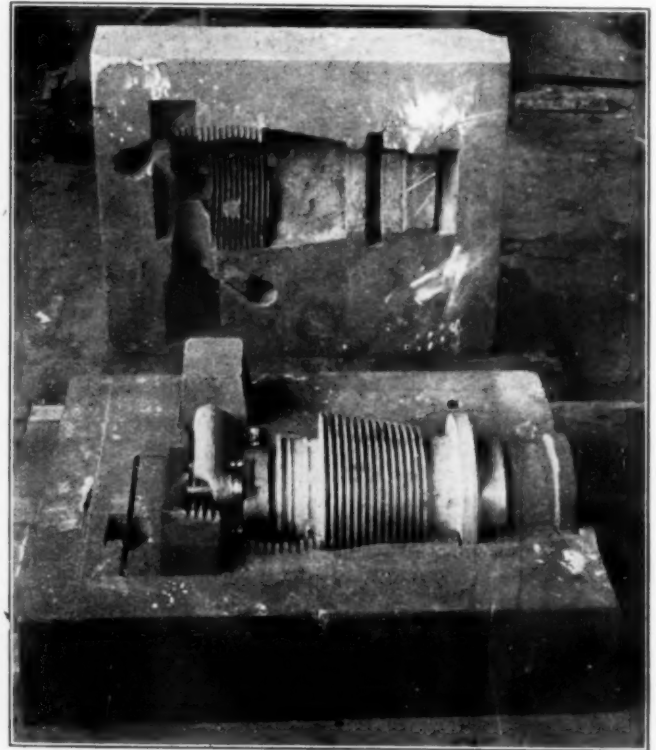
MOLD FOR CASTING ALUMINUM HEAD ON STEEL CYLINDER OF AIR-COOLED AIRPLANE ENGINE. DRY SAND CORES USED INSIDE AND OUTSIDE
